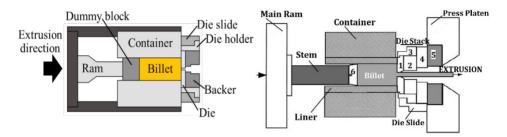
Extrusion tooling used in hot extrusion. [10, 15],1, solid die; 2, backer; 3, die holder; 4, bolster; 5, pressure pad; and 6, dummy block
